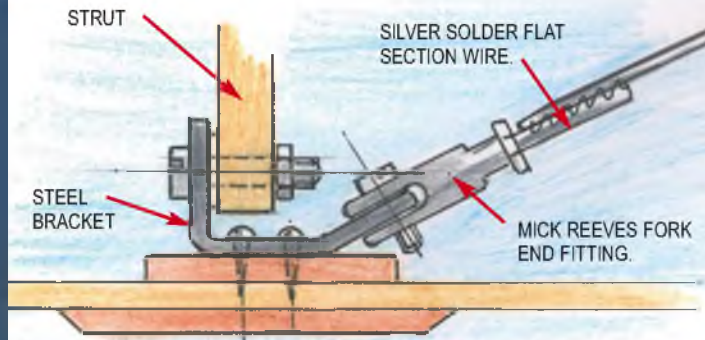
RIGGING WIRE ATTACHMENT METHOD.
